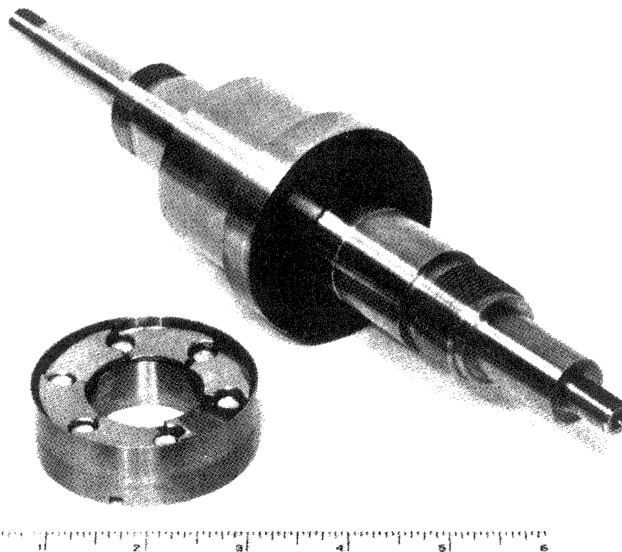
Tilting-Pad Equalized Thrust Bearing and Rotor. (built by Industrial Tectonics, Inc.)
